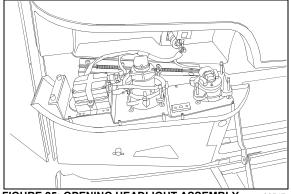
OPENING HEADLIGHT ASSEMBLY 06547
